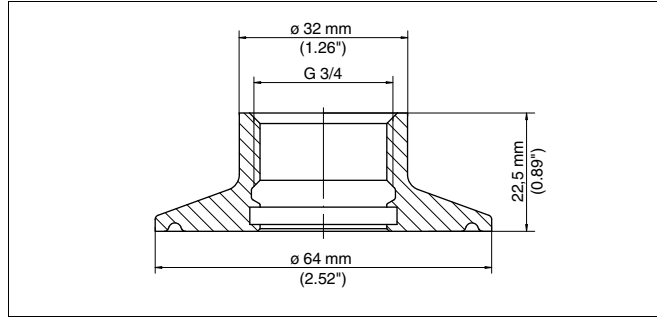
Dimensions adapter G $\frac{3}{4}$  A according to DIN 3852-X on Clamp 2" PN16 ( $\varnothing$  64 mm) DIN 32676, ISO 2852/316L
